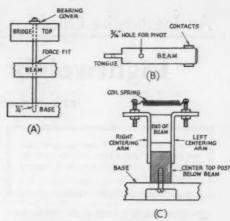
Sketches showing several details of the sideswiper construction. These drawings are not to scale.
